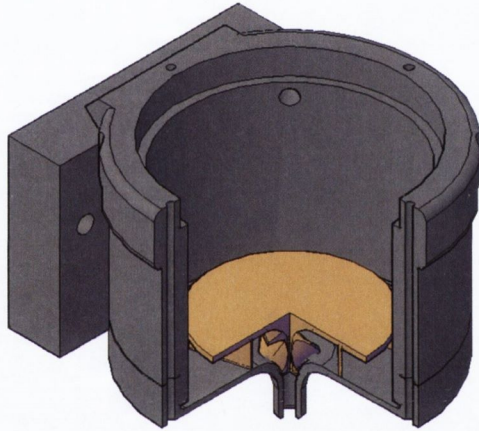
Cross-section of full jet assembly including swirl generator “ L_c ”
